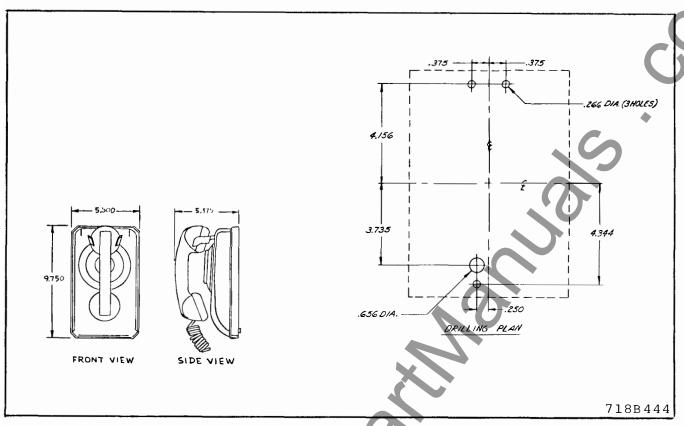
Mounting Dimensions for wall mounted Hookswitch- Handset Assembly
